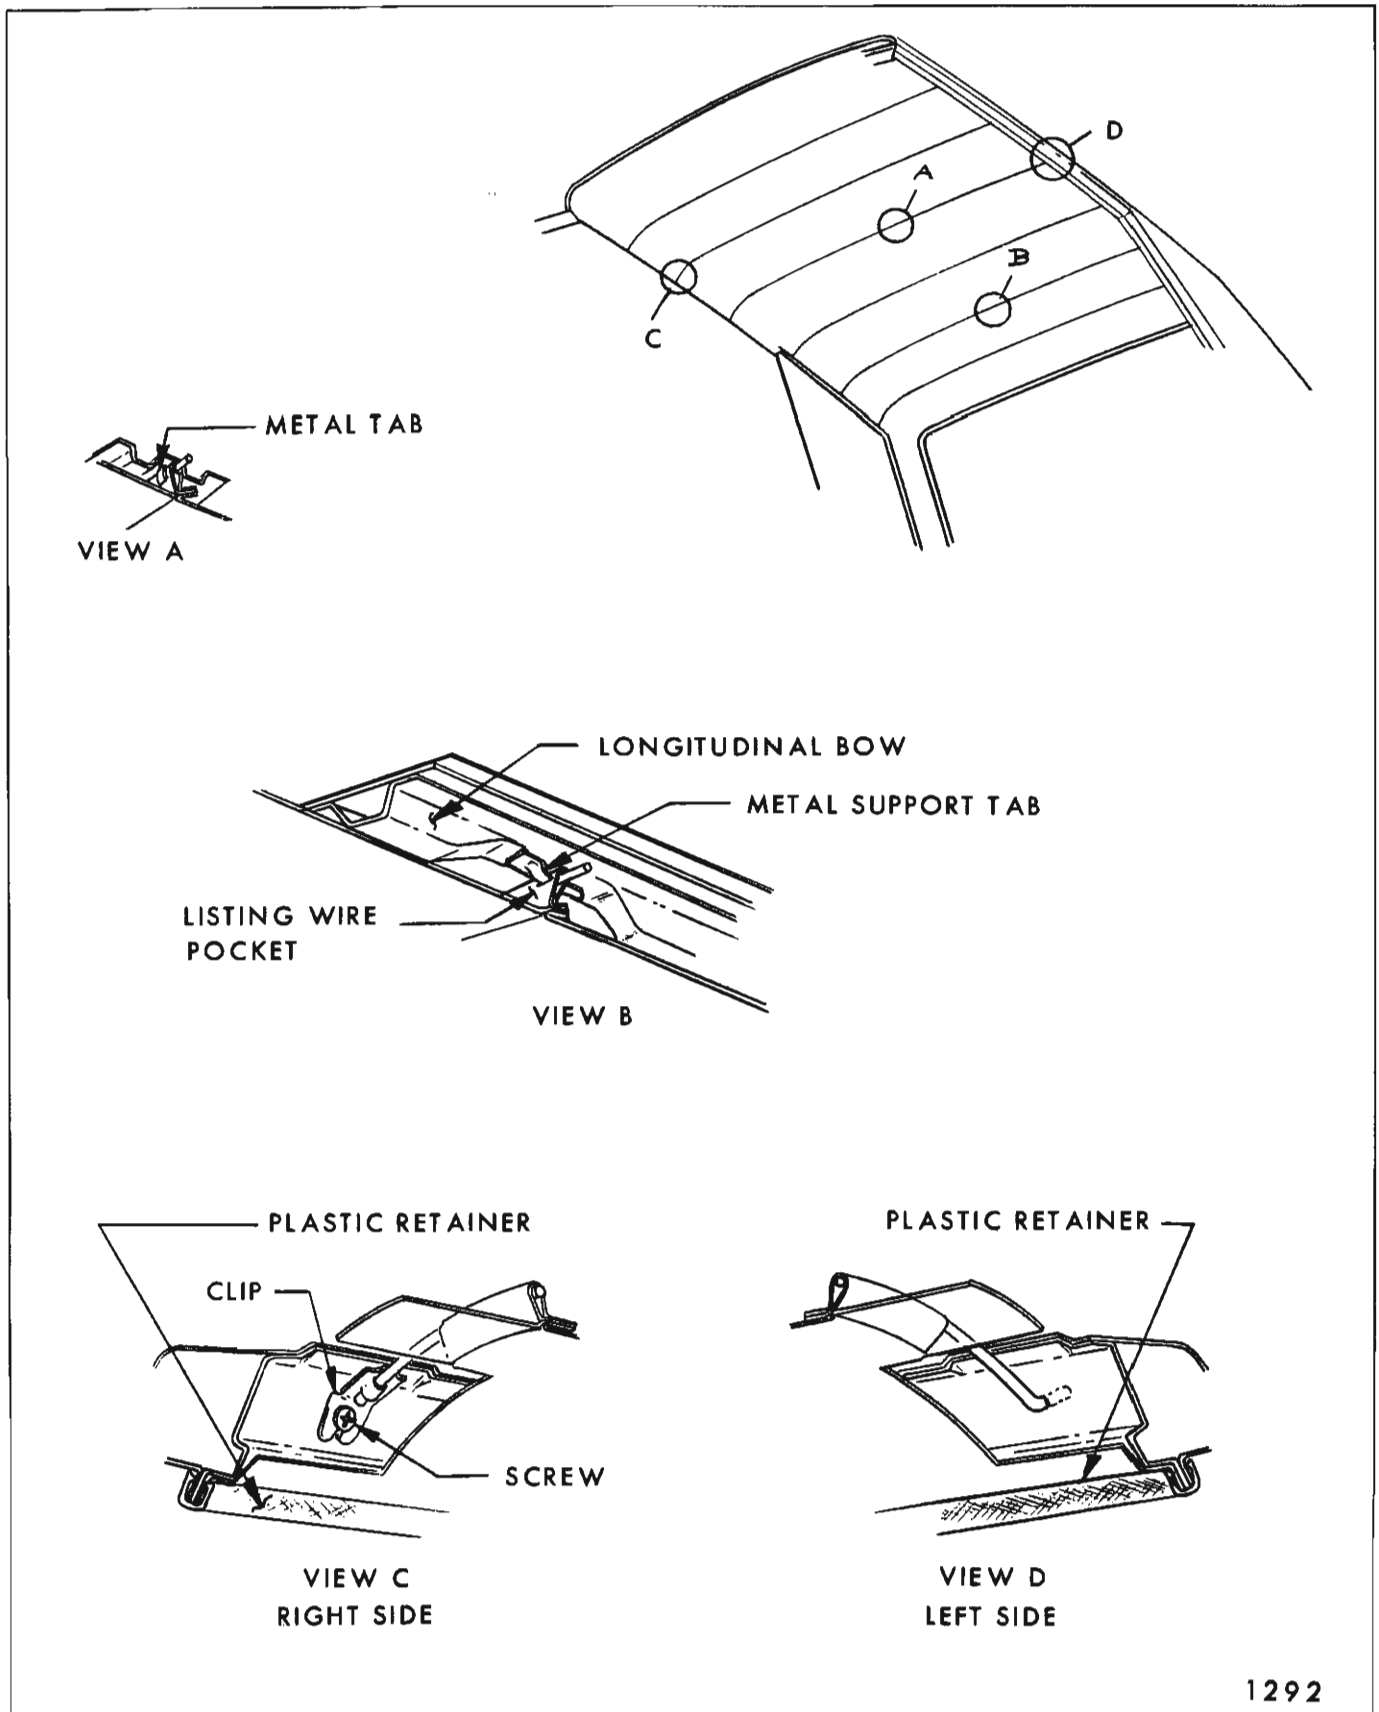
G3—Headlining Installation - "27" and "37" Styles Only
